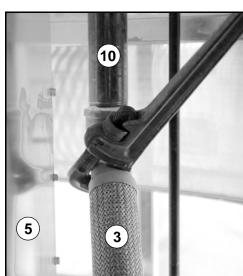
Main Gas Flex Hose to Bottom End of Upper Main Gas Pipe
